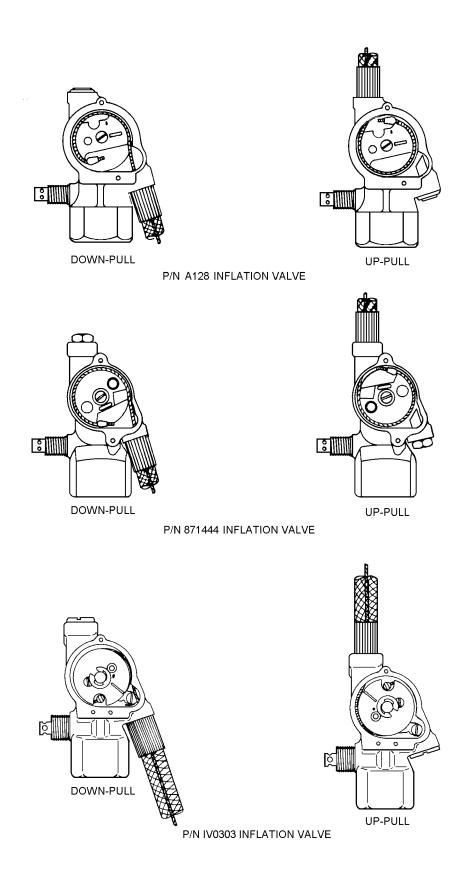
Routing of Multiplace Liferaft Pull Cable
